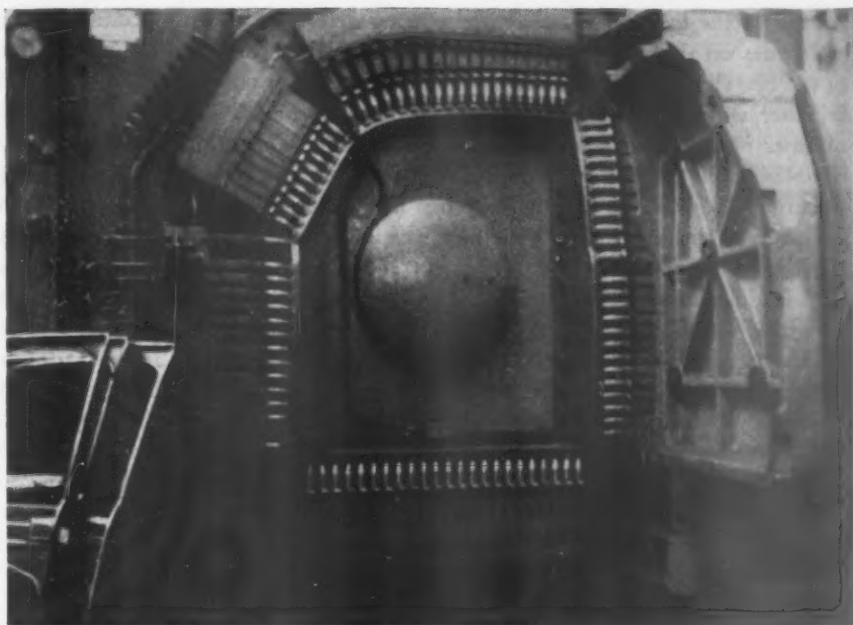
Multi-electrode spot welding machine
